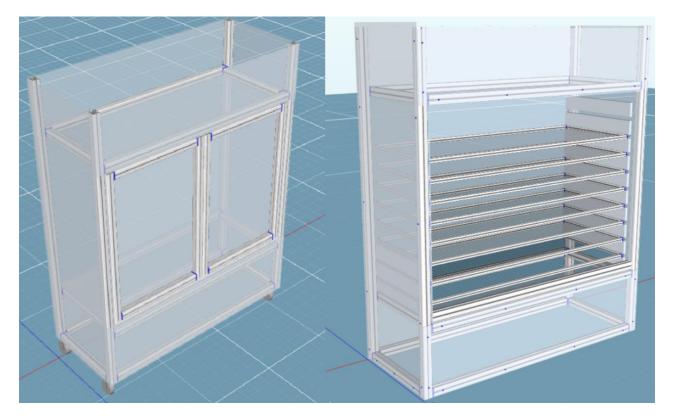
View of rain test bench frame (1500x600x1950mm) with shelves
